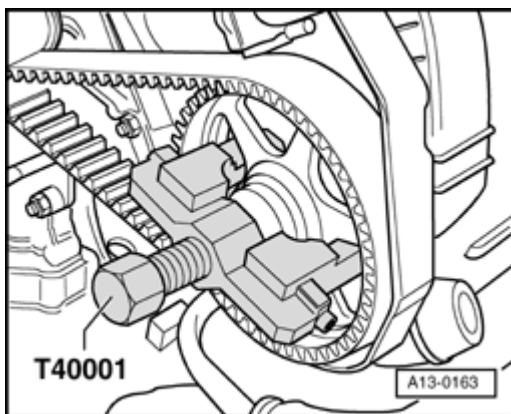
Removing Camshaft Gears Using Puller T40001 With Claws T40001/2
